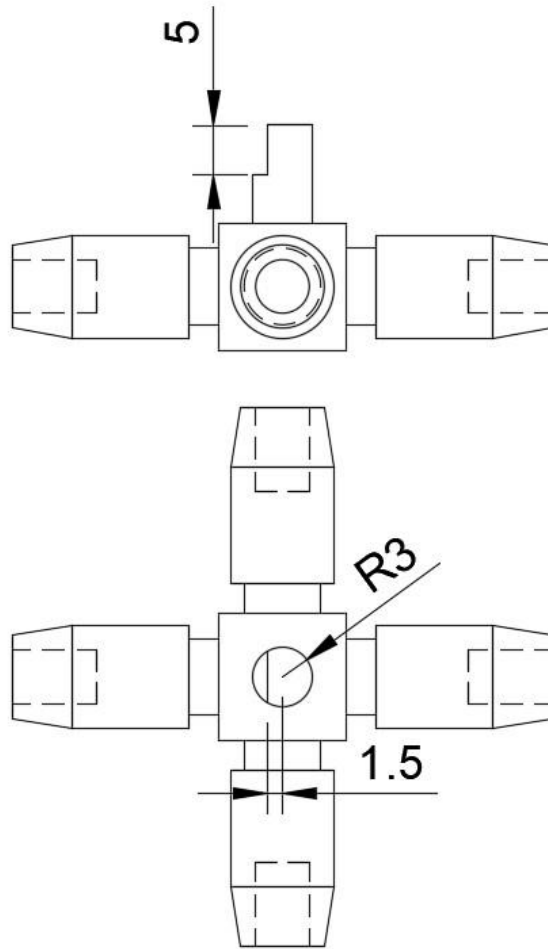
Dimensions of the notch that must be cut into the valve's PCTFE axle. This modification applies to both the low-pressure and high-pressure valves after their knobs have been removed. Be sure to record the valve's position before removing the knob to avoid difficulties when reassembling it later.
